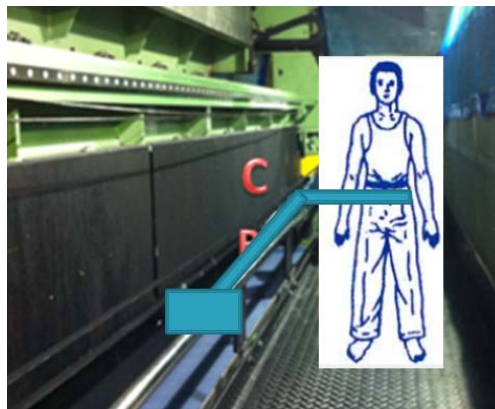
Concepts to Design Hot Rollers Cleaning Tool
